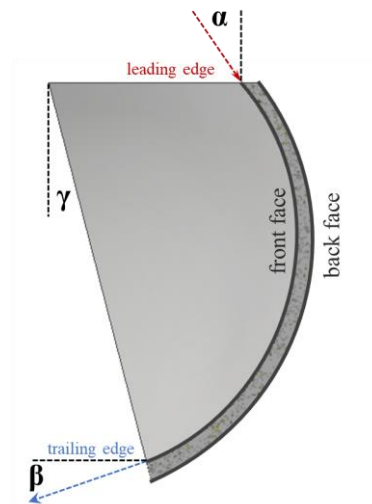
Section view of the blade in the central plane which identifies α – entry angle, β – exit angle and γ – blade cut back angle.
